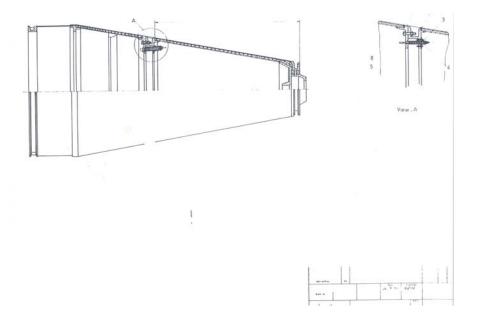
Figure IV.III.XVIII A separable warhead design using explosives bolts.
